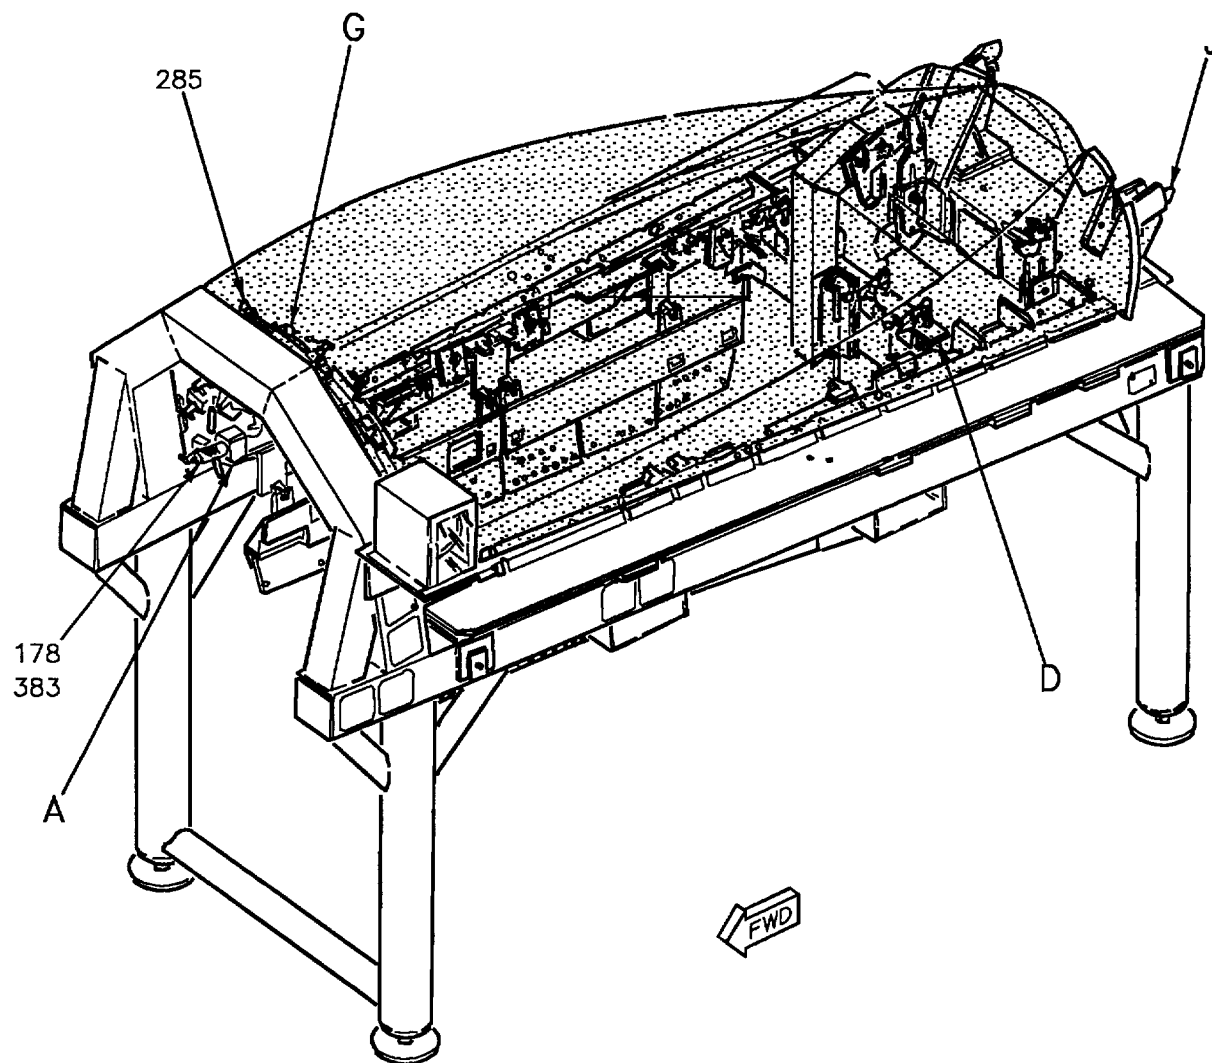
Inspection or Replacement - Hinge and Pivot Stop (Sheet 1)
